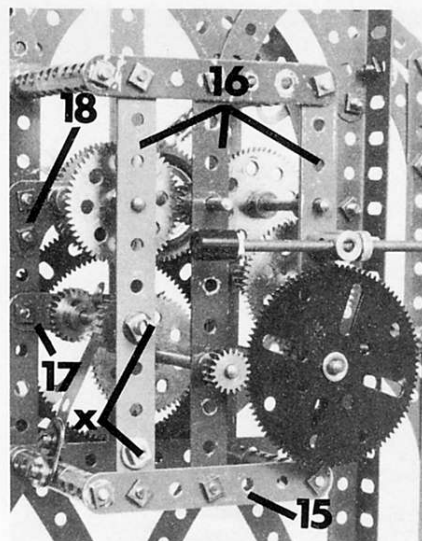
The 2'' Strip 17 requires careful adjustment to insure the best operation.
